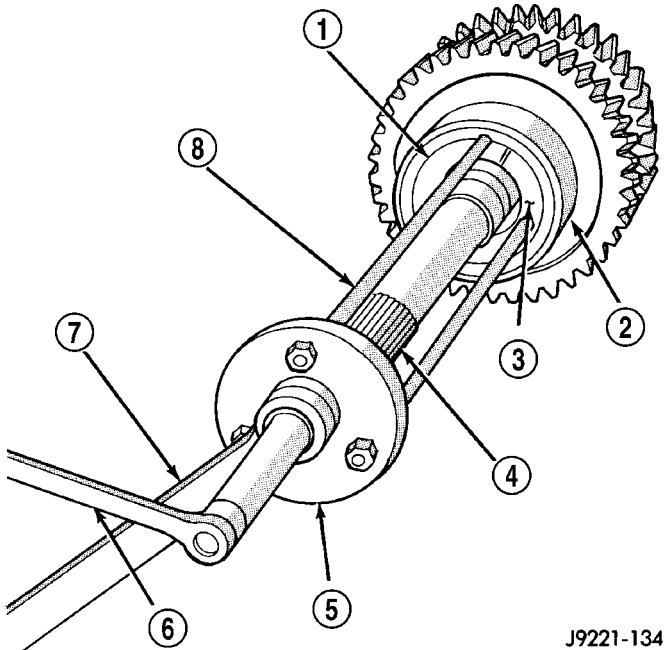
MAINSHAFT REAR BEARING PULLER
